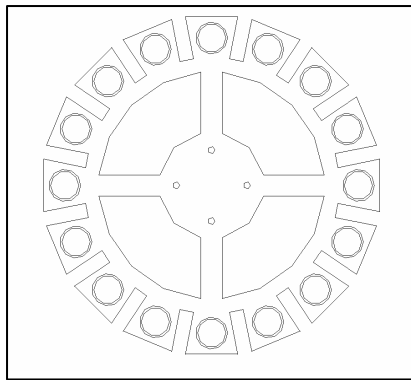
AutoCAD drawing of specimen well-plate for CNC fabrication
